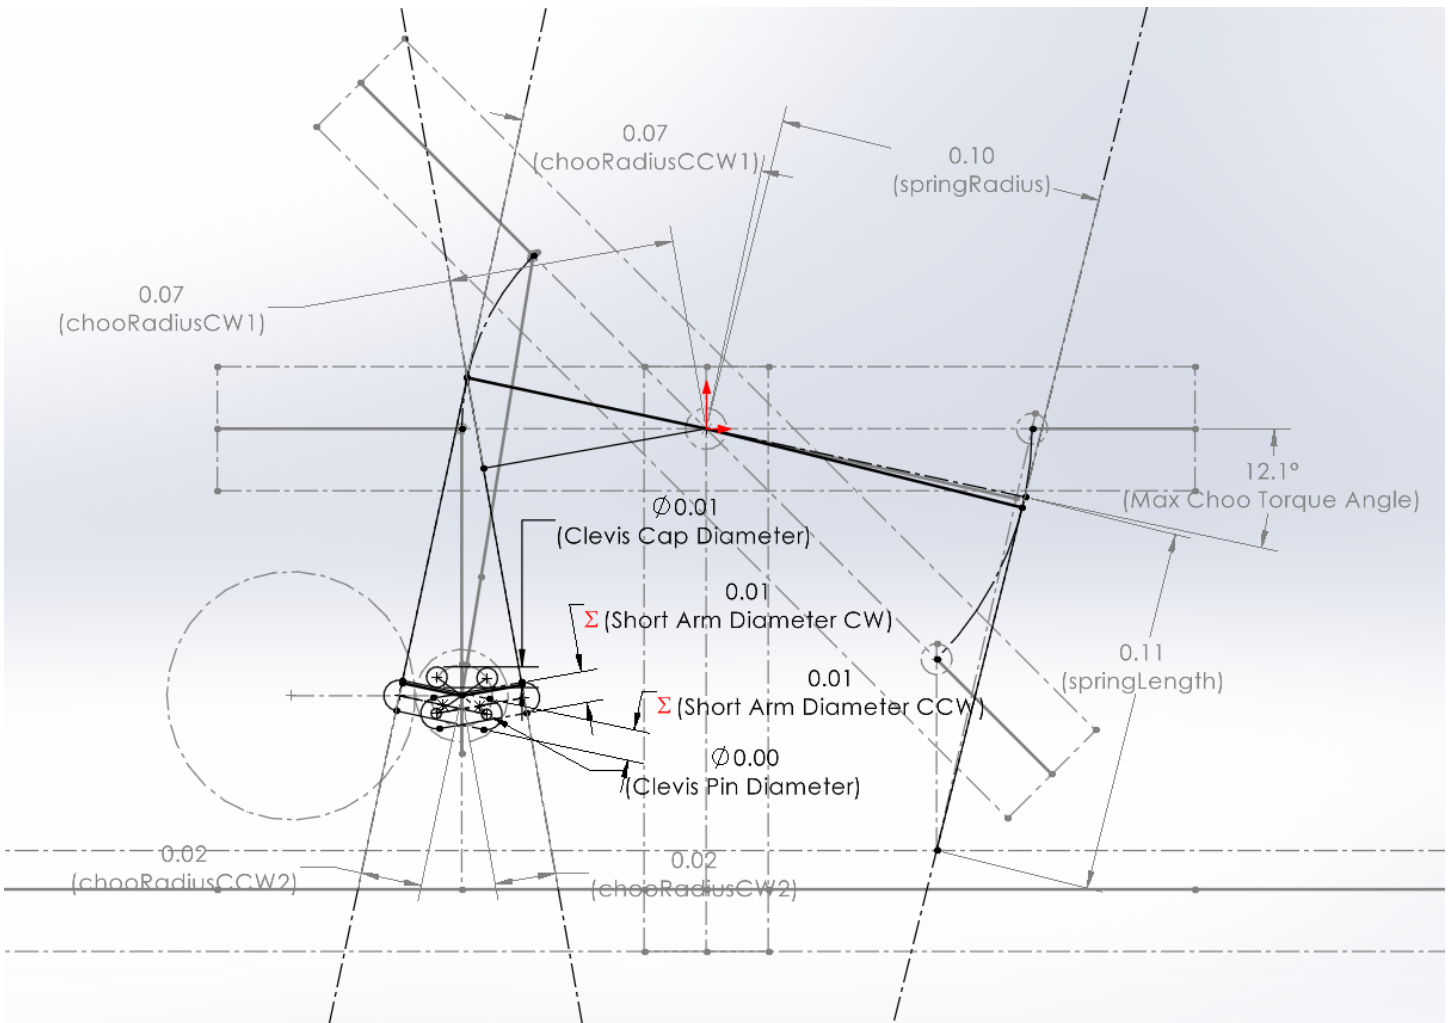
Sketch “Calculations” on Right Plane of CAD Model Assembly.
